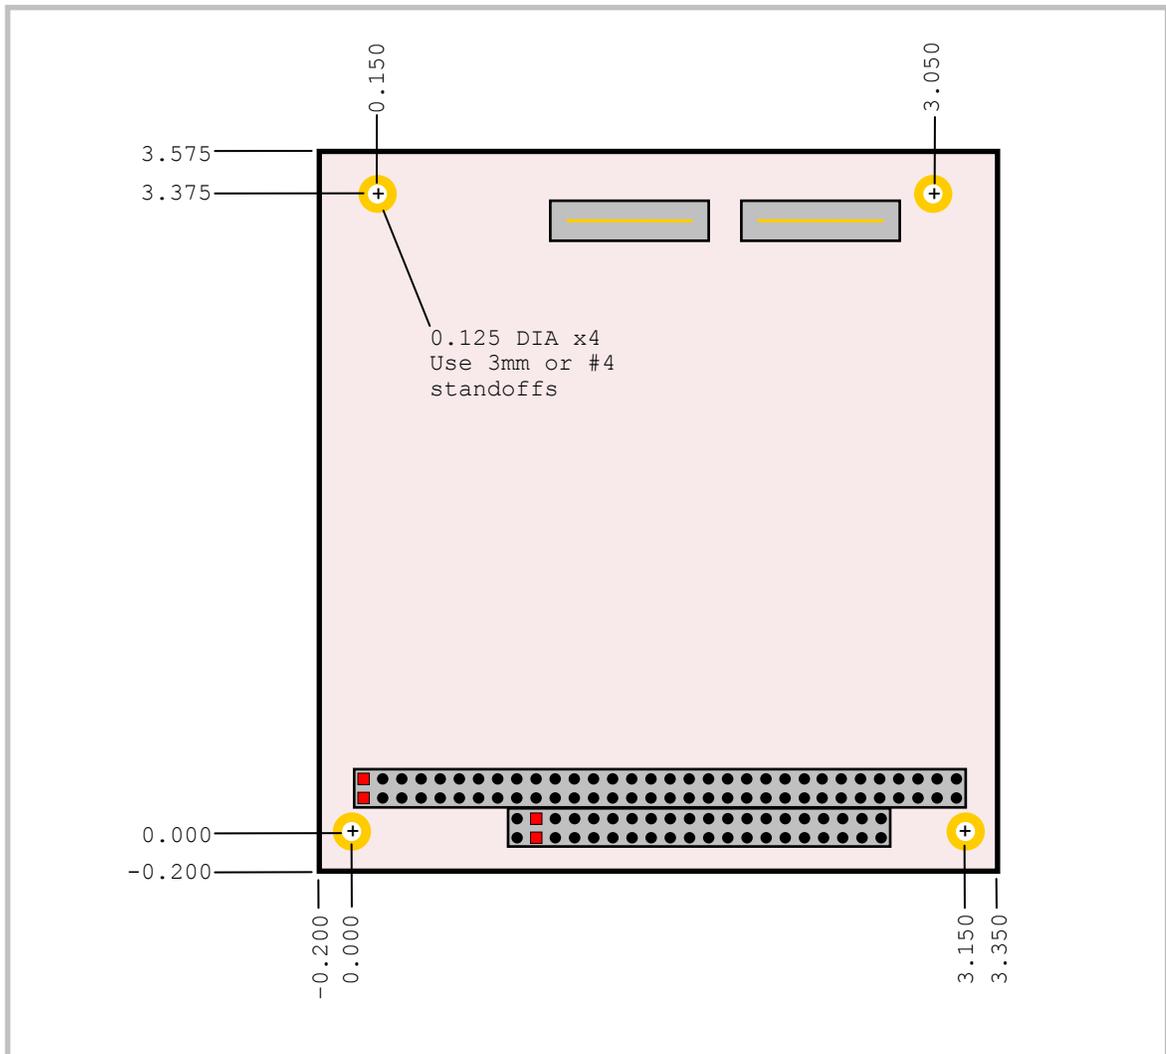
VL-EPMs-E1 Dimensions and Mounting Holes
